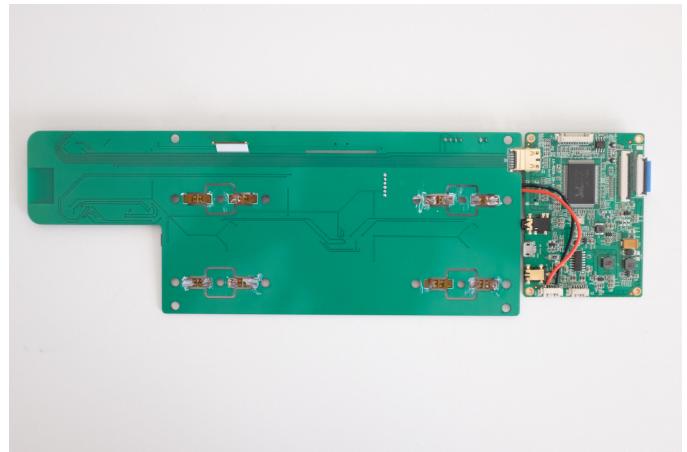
Bottom view of the motherboard assembly. Note the placement of the strain gauges on the load surfaces.
